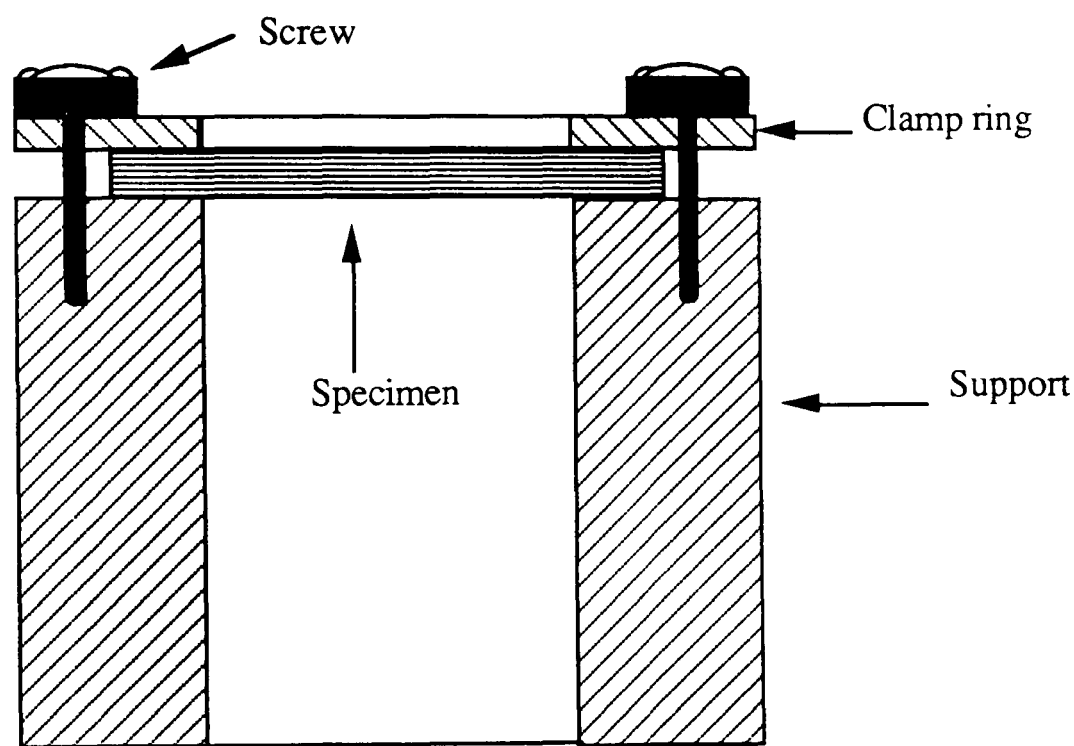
The clamping technique used for clamping the impact specimens.
